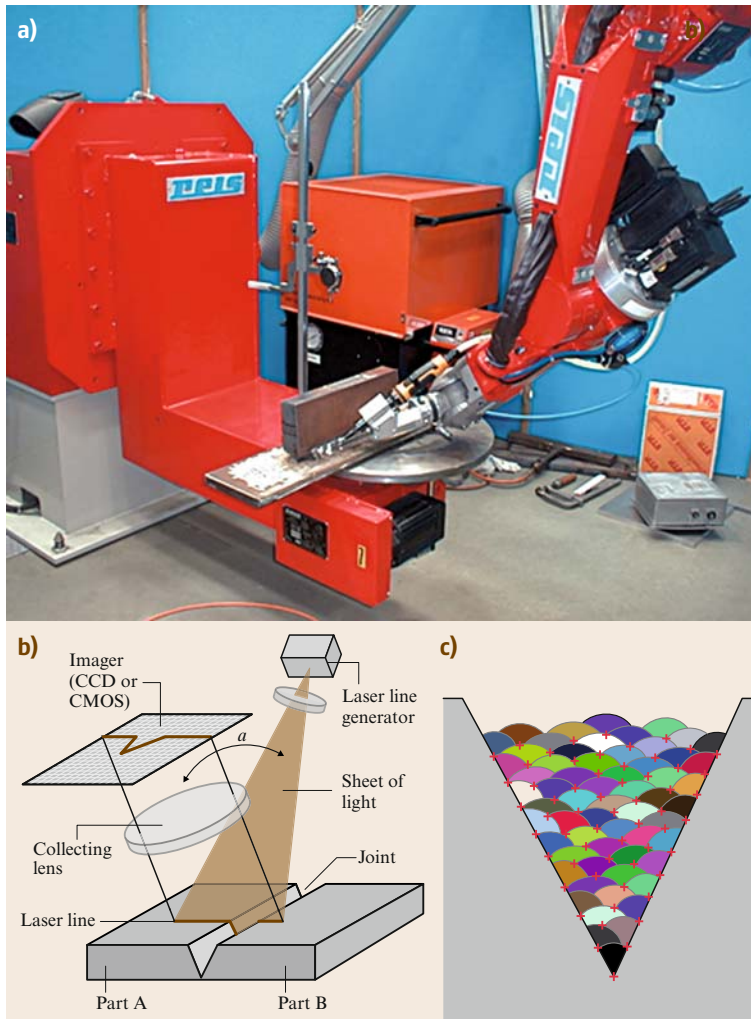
c Robot welding with sensor guidance. (a) The welding robot workcell consists of a 6 DOF robot, a turning table so that the seam is accessible and welded in a flat position, the weld source with a fume extractor and the welding torch. Safety fences and light shields are not shown. The welding torch is attached to the robot flange. A service station (not shown) in the robot workcell is approached regularly to clean the gas nozzle. (b) A typical weld seam sensor is based on the so-called laser triangulation principle. The sensor is attached to the robot and a laser projects a sharp stripe on the seam. The stripe is detected by an imager, typically a 2-D CCD camera. From the extracted contour the position of the seam relative to the sensor is calculated. (c) Multiple seams can be generated based on this information
